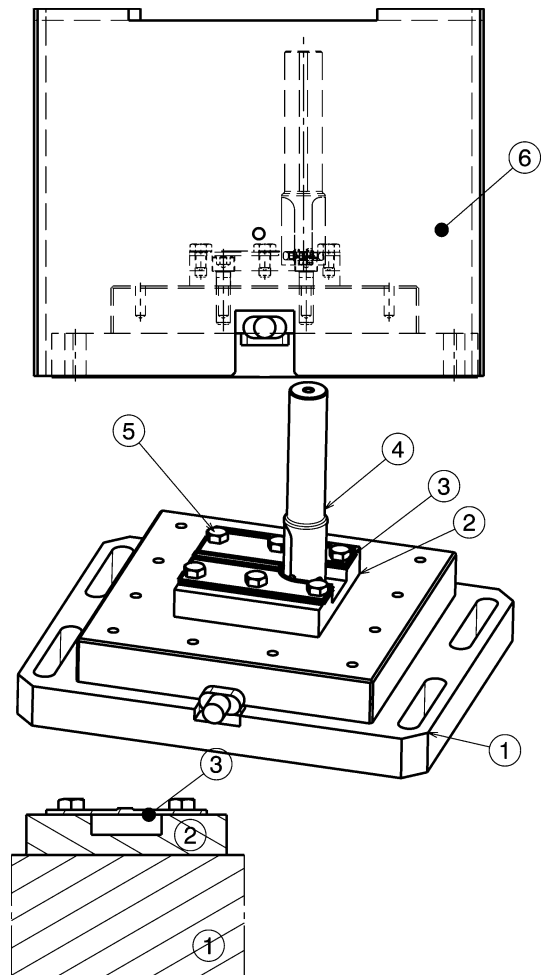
Experimental setup design for measuring machining dust during orthogonal milling process—1: Three axes dynamometer; 2: Support; 3: 6061-T6 aluminum workpiece; 4: Cutting tool; 5: Fixture screw; and 6: dust cover
